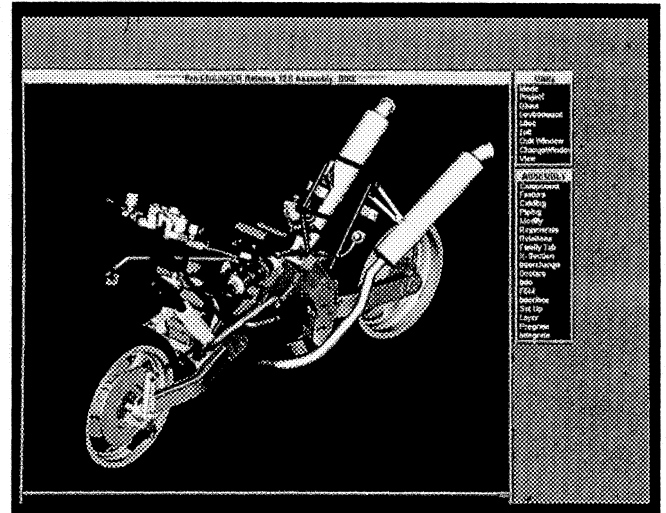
(b) Motorcycle with Body Shell Removed
